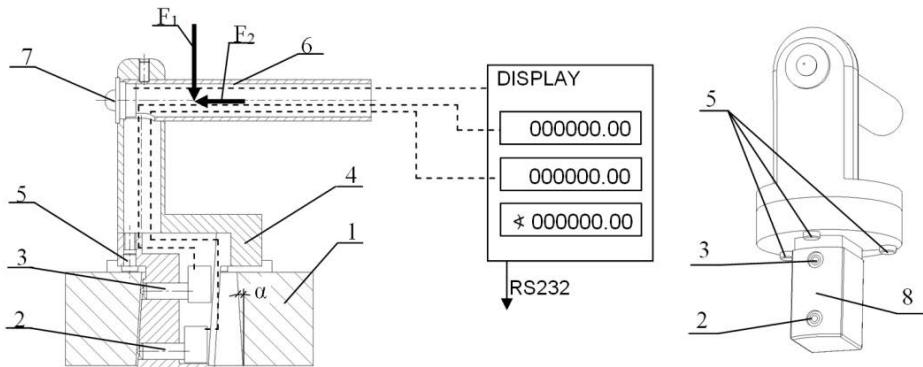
Structure of the device with miniature linear sensors: 1 – detail with a bore, 2 and 3 – miniature linear sensors, 4 – body, 5 – grip, 6 – handle, 7 – measurement start button, 8 – front surface of the bracket
